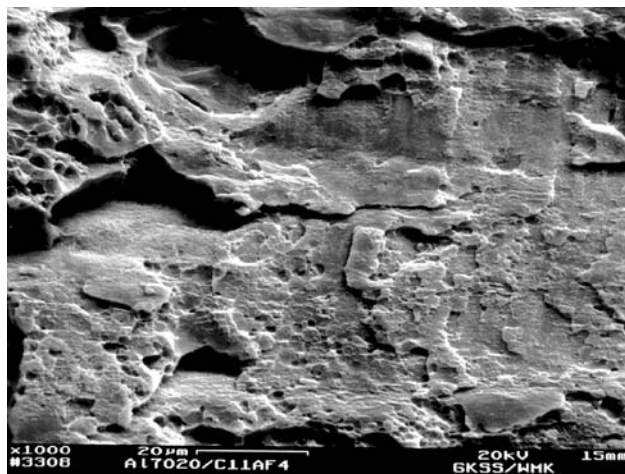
SEM micrograph showing fracture surface of transverse tensile specimen failed in the fusion zone (intergranular fracture)
